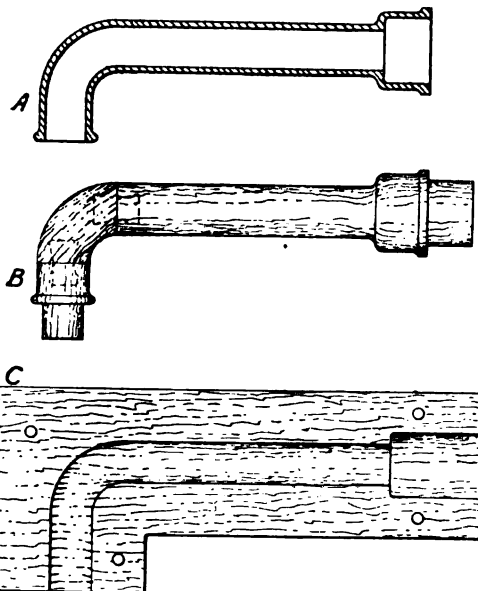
Casting, Pattern, and Core Box for Bend.
